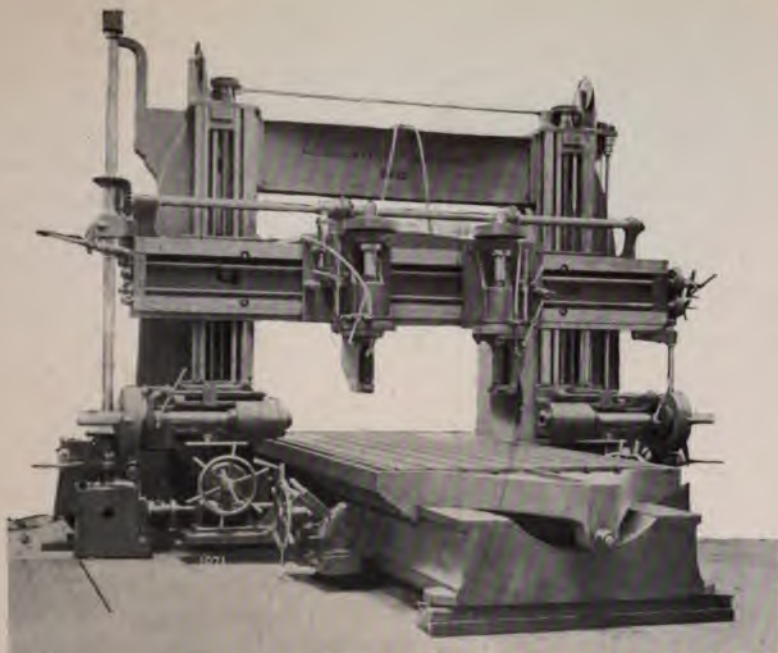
FOUR-SPINDLE PLANO-MILLING MACHINE. (Kendall & Gent, Ltd.)
